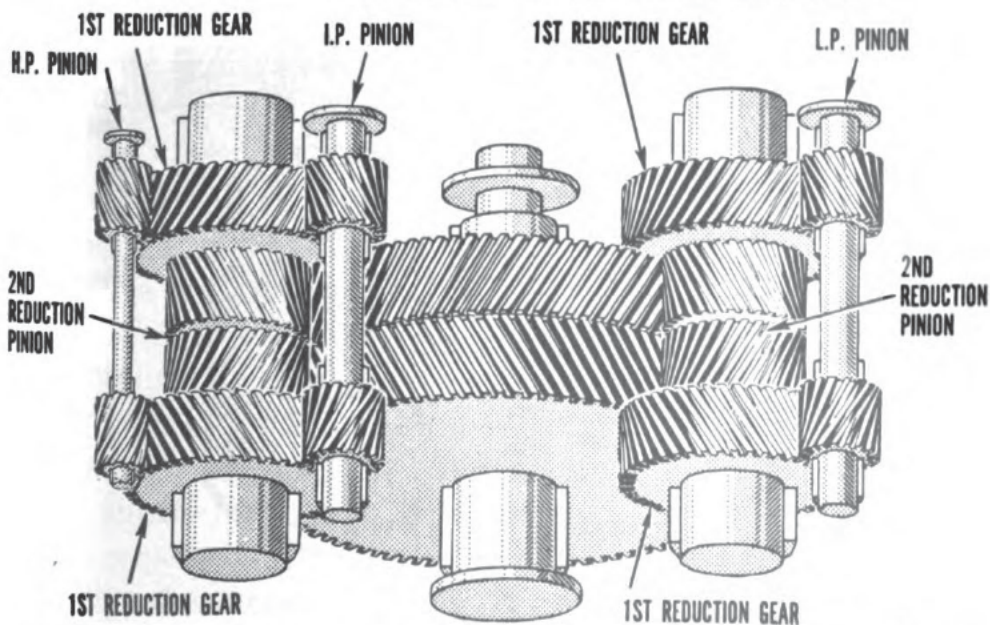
Nested type gearing, with divided 1st reduction pinion and gear.
